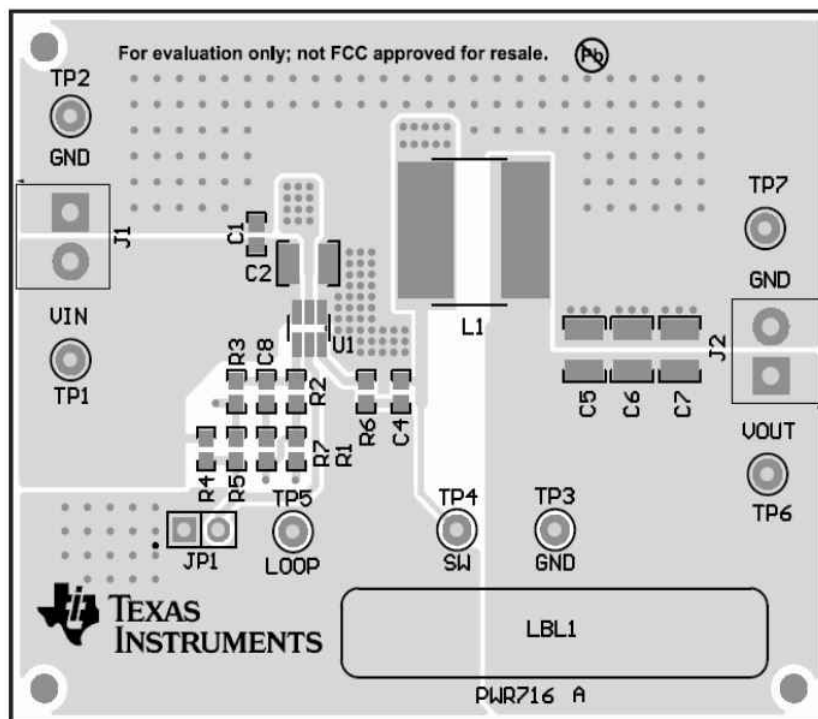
TPS54202HEVM-716 Top-Side Assembly
